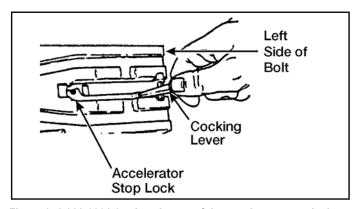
Attachment of the accelerator stop lock
